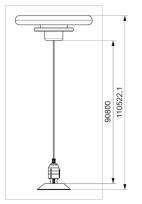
Side view of the assembled space elevator with dimensions (km) [own source].
